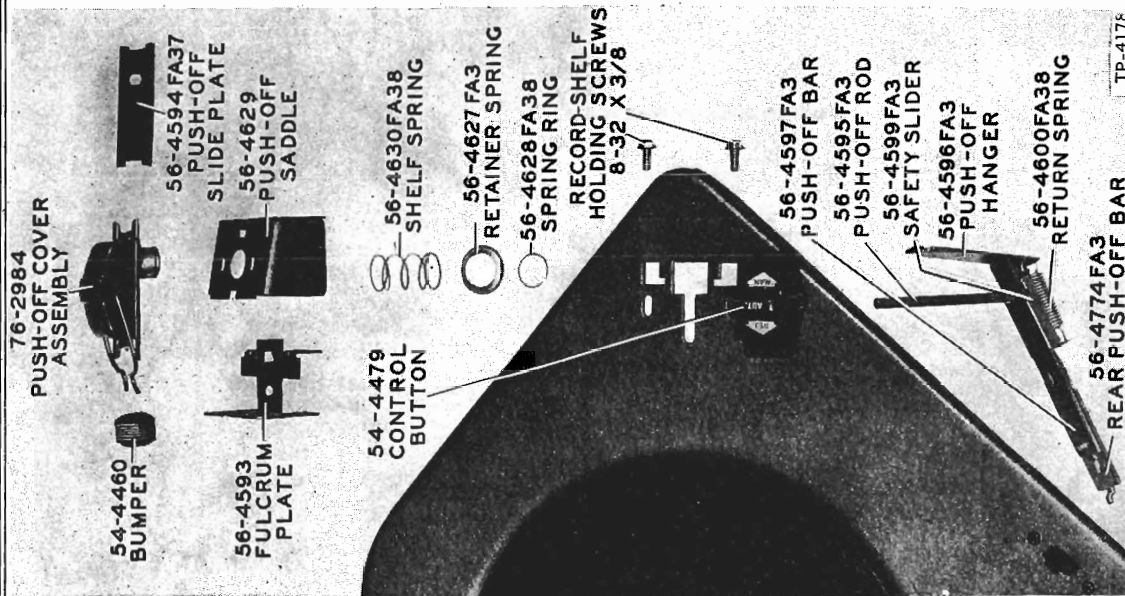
RECORD-SHELF AND PUSH-OFF ASSEMBLIES, REMOVED
